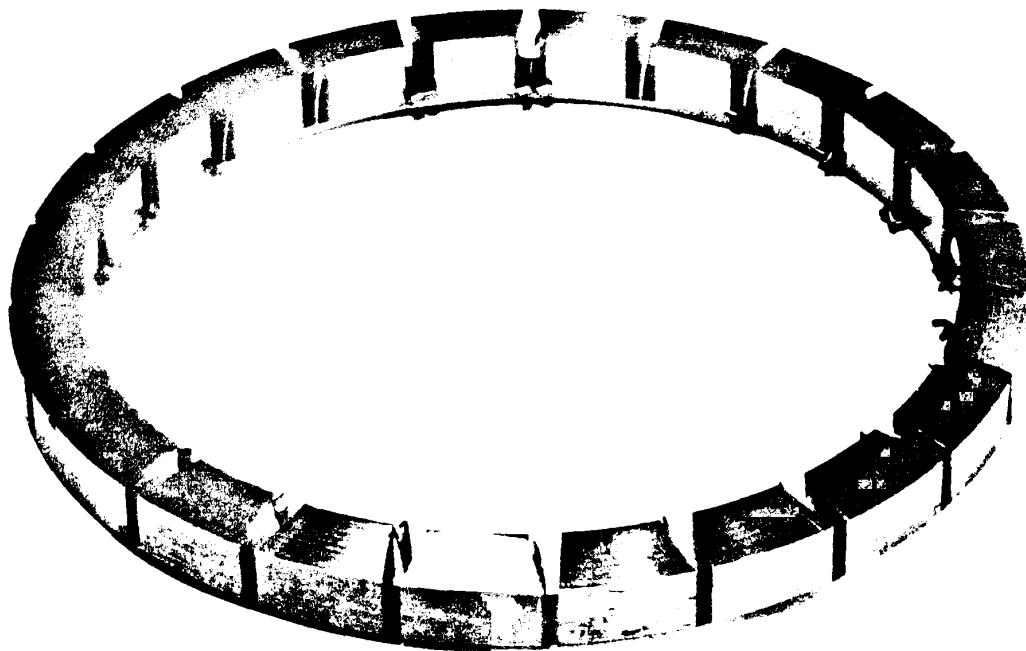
Partly completed mild steel spacers for use in the composite grinding wheel
